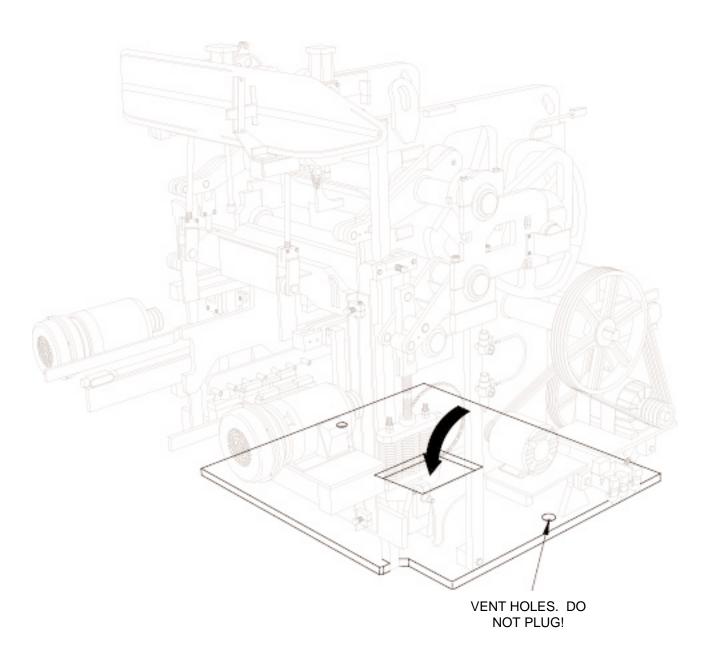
POUR NON-SHRINK GROUT INSIDE. FILL-UP TO TOP OF MACHINE BASE PLATE
